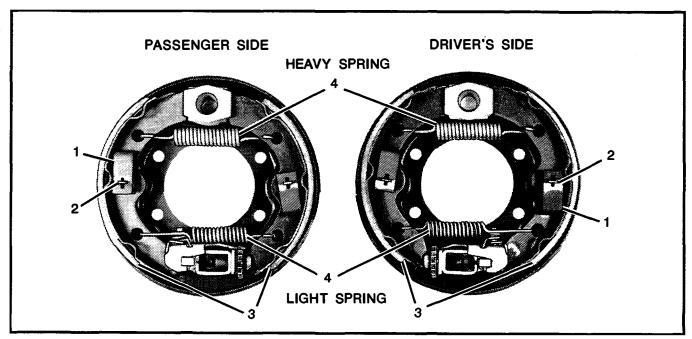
WHEEL BRAKES DRIVER'S AND PASSENGER SIDE
